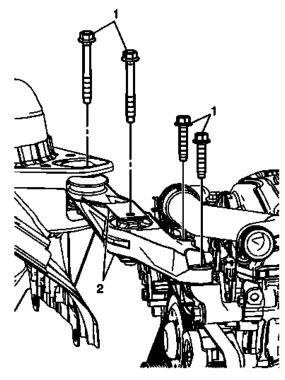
View Of Right Side Engine Mount Strut Courtesy of GENERAL MOTORS COMPANY
